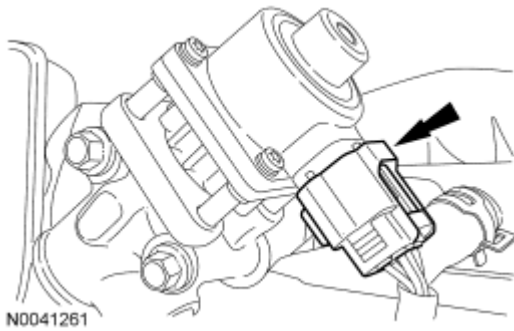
Locating Exhaust Gas Recirculation Valve Electrical Connector
